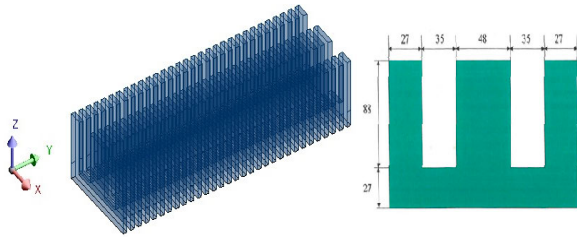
3D-view of TFLIM primary part and dimension in mm of a ferromagnetic sheet [23], [24].
